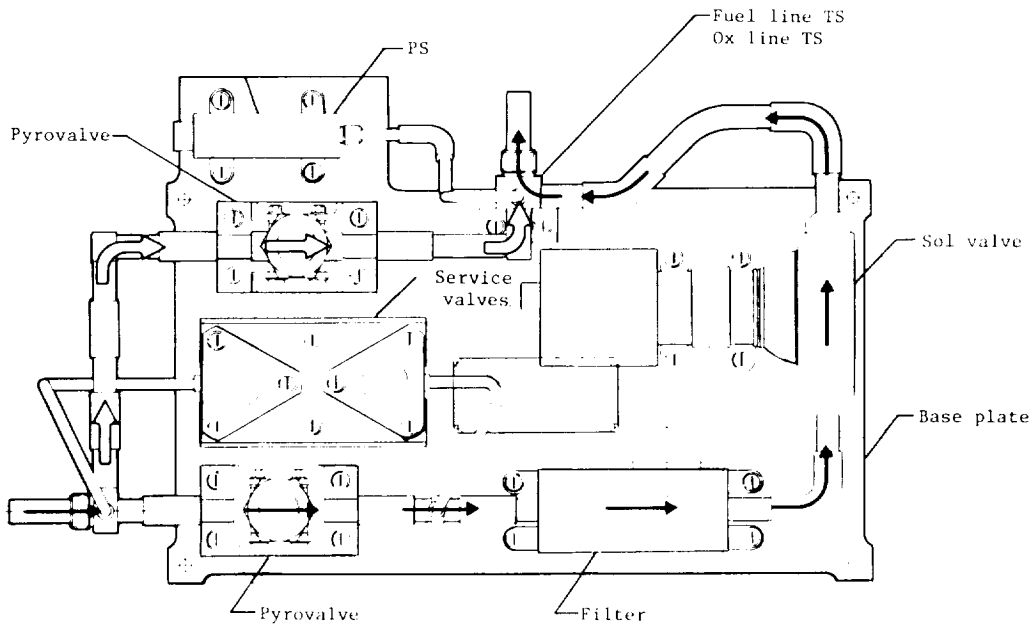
Flight temperature sensor locations, propellant isolation assembly.
